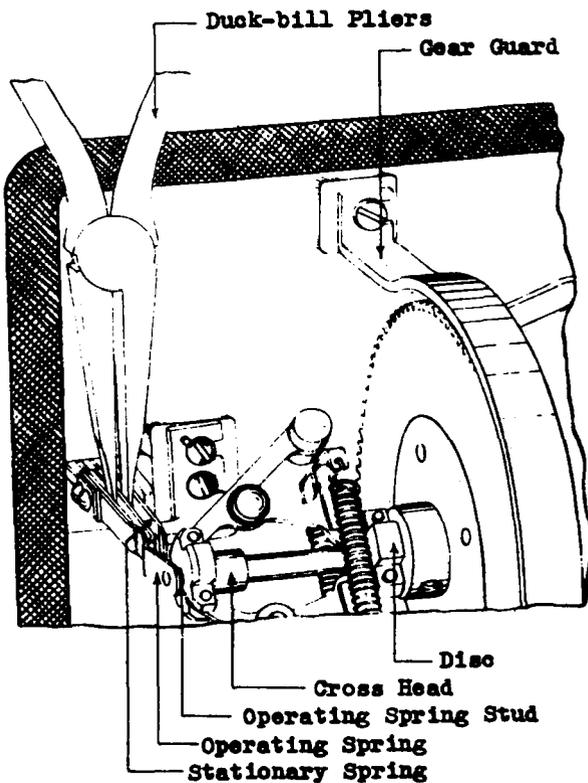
Method of Adjusting the Tension of the Operating Spring
